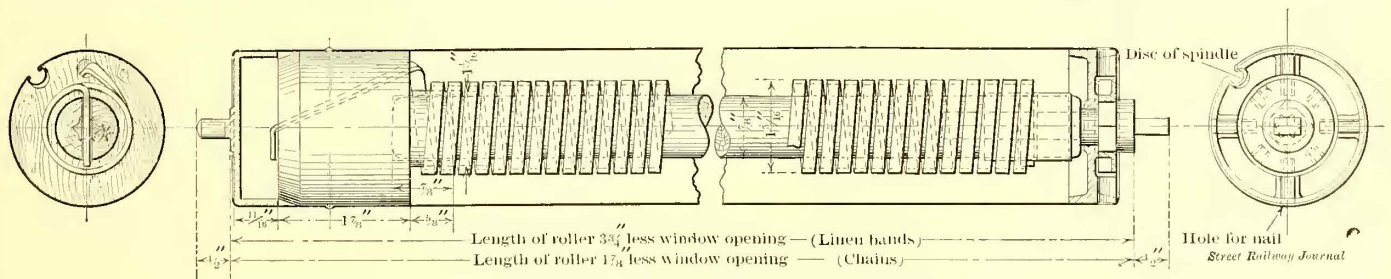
SECTION AND END ELEVATIONS OF SASH-HOLDER
